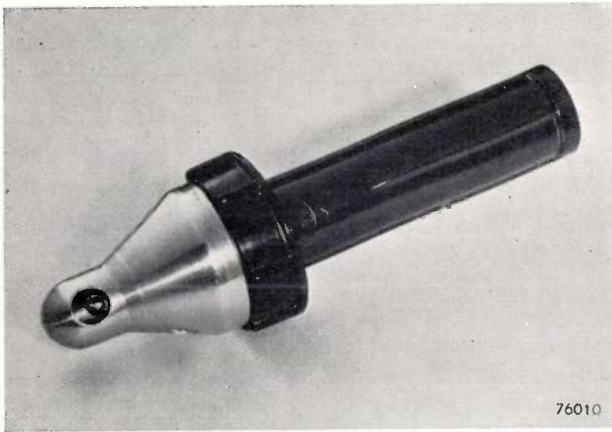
Example of an electrode holder with insulated handle ("Safeweld" make).
